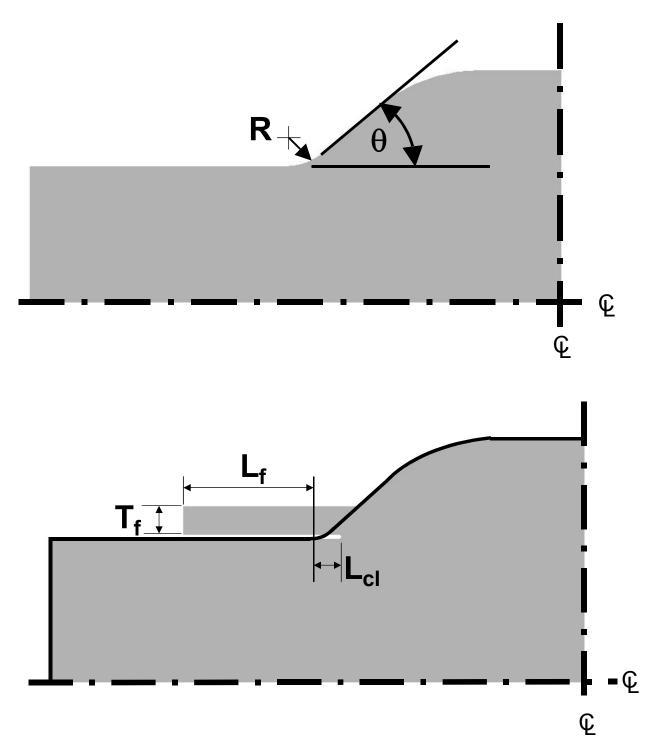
(above) Geometry of a thermite weld-toe without fins or cold laps: R is the weld toe radius and θ is the flank angle. (below) Geometry of a thermite weld-toe with both a fin and cold lap defect: T_f is the fin thickness, L_f is the fin length and L_{cl} is the cold lap length. All measurements originate at the point of tangency between the weld reinforcement and the rail. The solid outline indicates the defect-free geometry.
